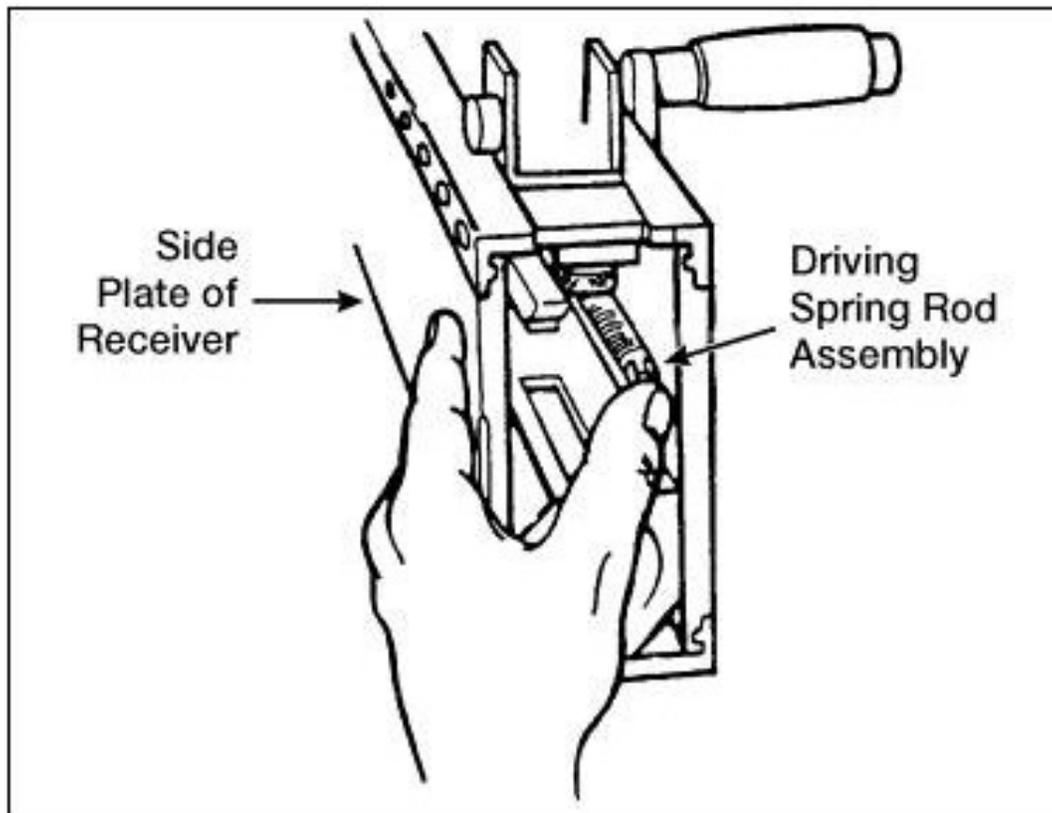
ST-1025_41 (Installation of the driving spring rod assembly)
